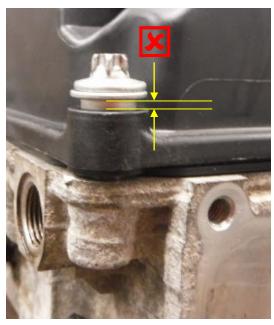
Electric impact tool achieved specified torque, yet gasket was not compressed due to sleeve stand off.
